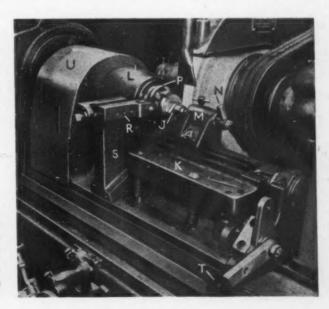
A Specially-developed Cam Grinding Attachment is Here Seen on a Brown & Sharpe No. 2 Universal Machine. A Stack of Cams is held on a Mandrel which is Mounted between Centres on a Swinging Platform. The Platform is Oscillated by a Master Cam on the Workhead Spindle, which is Driven from the Machine Headstock
